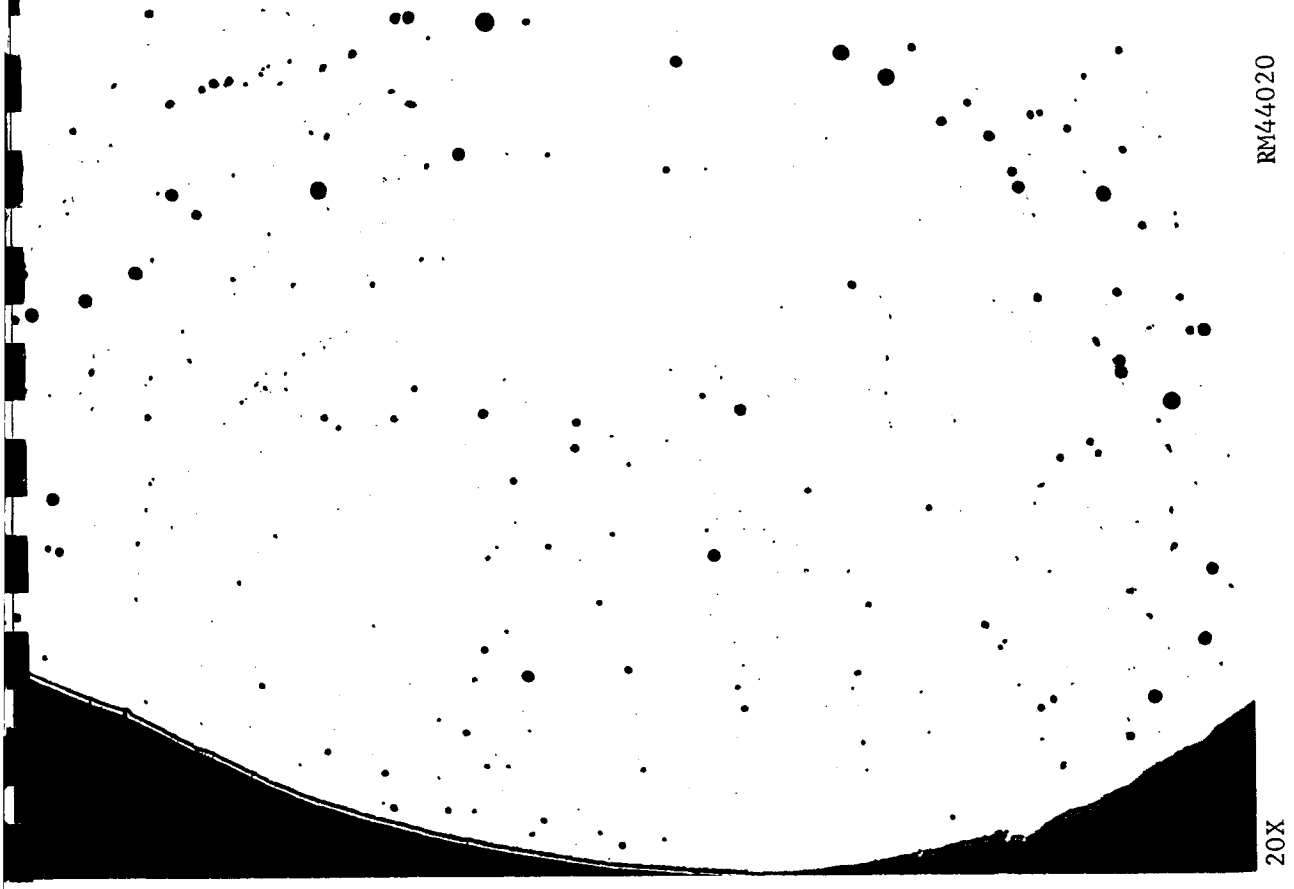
TYPICAL CROSS SECTIONS OF WELDS WITH X2319, TYPE 2 FILLER WIRE
